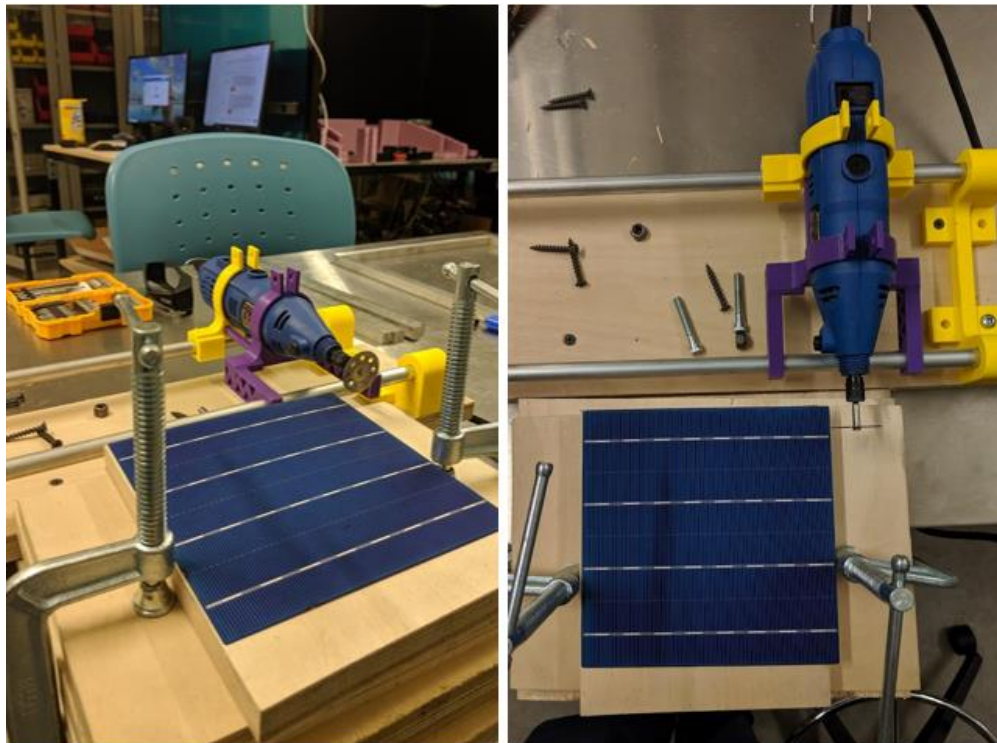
3D printed Dremel cutting rig for cutting solar cells
